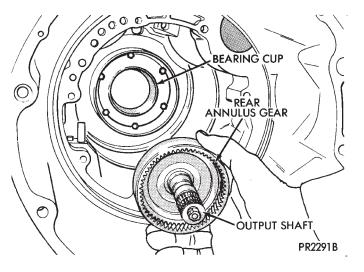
Remove Output Shaft and Rear Annulus Gear Assembly
